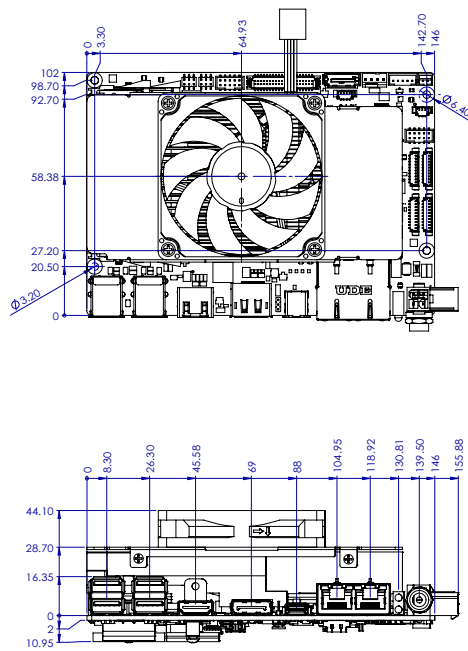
MIO-5375 Mechanical Drawing (with Cooler)
